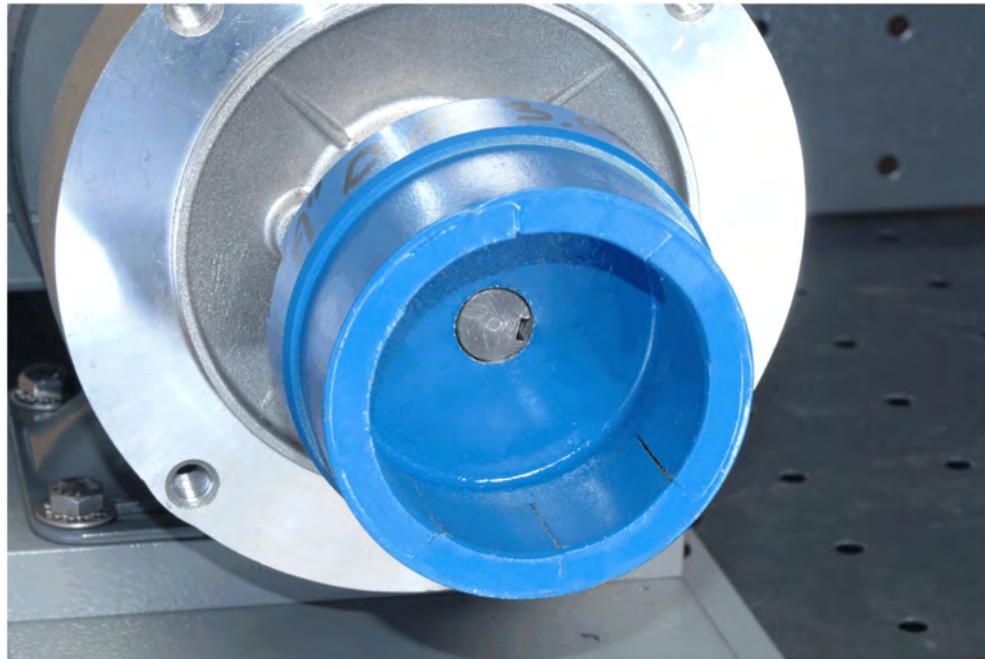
Install the magnetic coupling on the Motor shaft.
